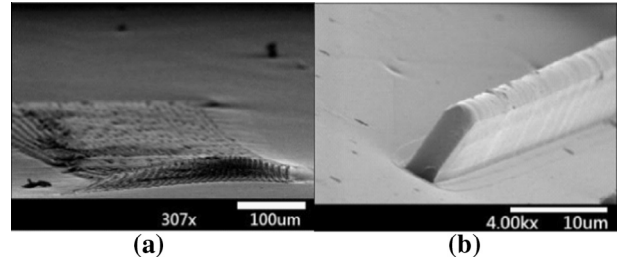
Defects caused by the excessive heating of the mold insert. (a) collapse of micro-structures, (b) weld-line.
